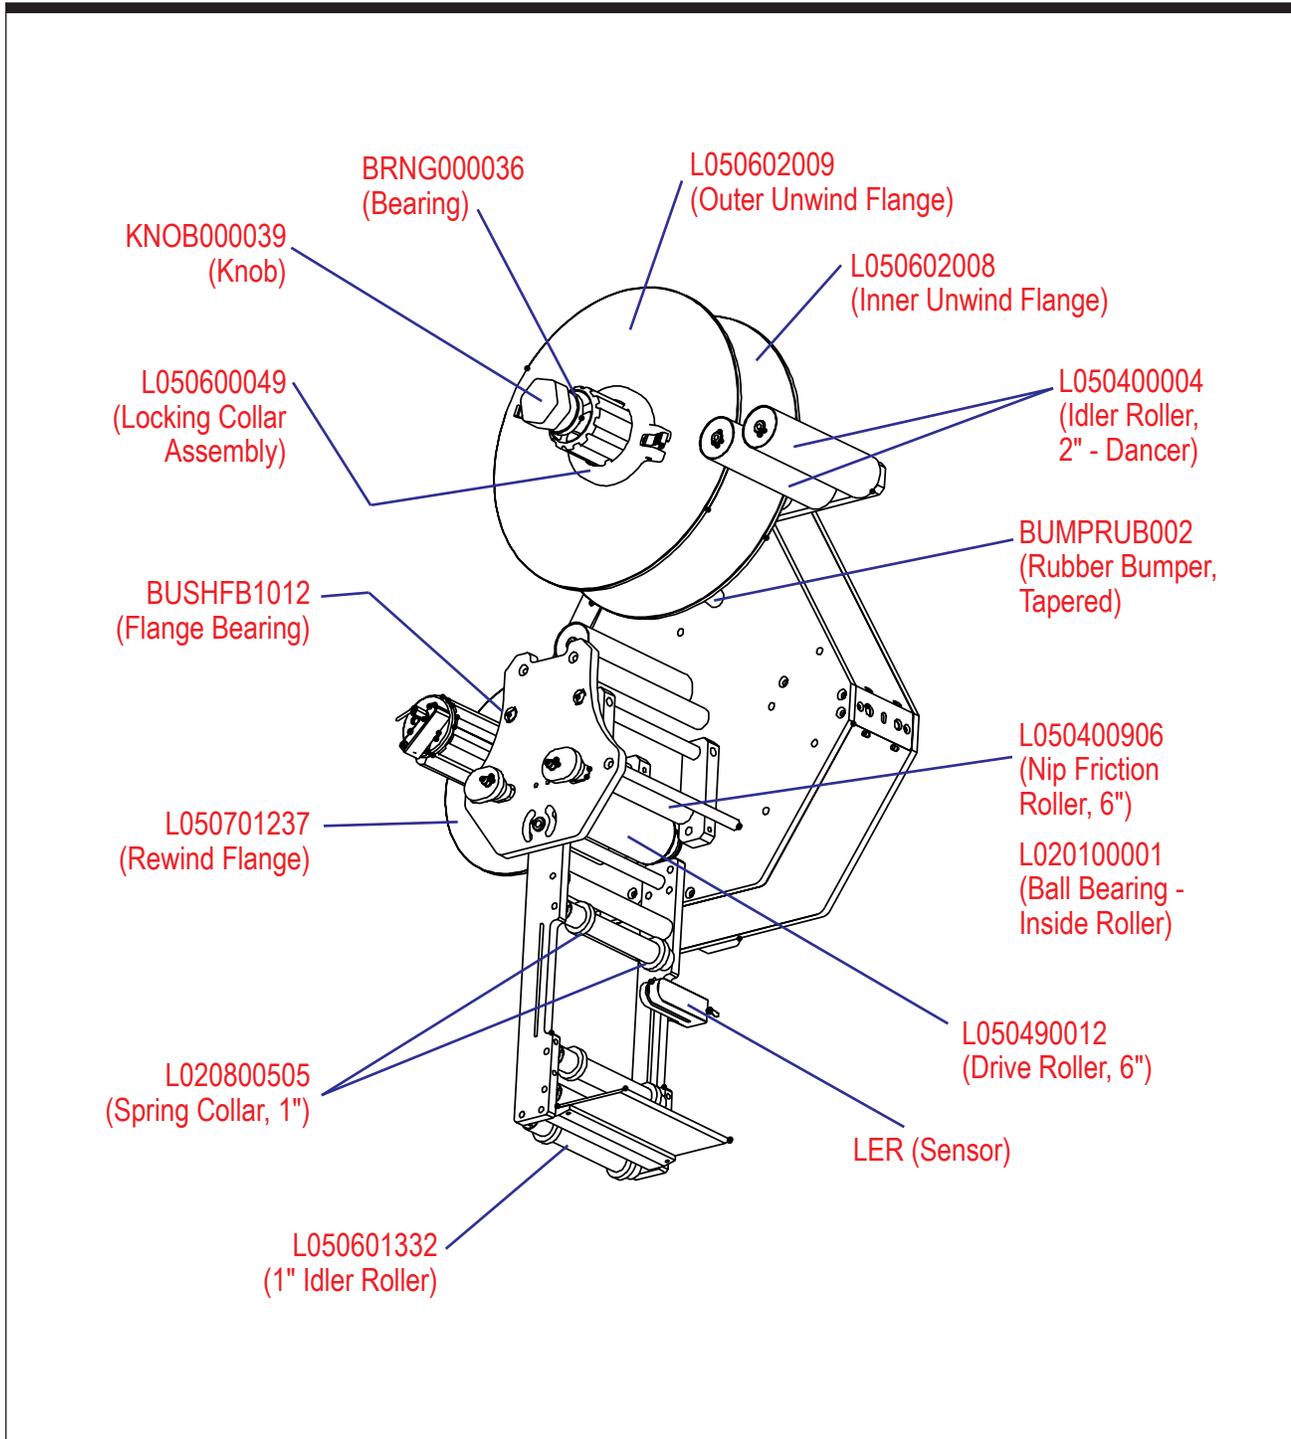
L410A Labeler with 6" Head - Front and Side Views - Callouts
